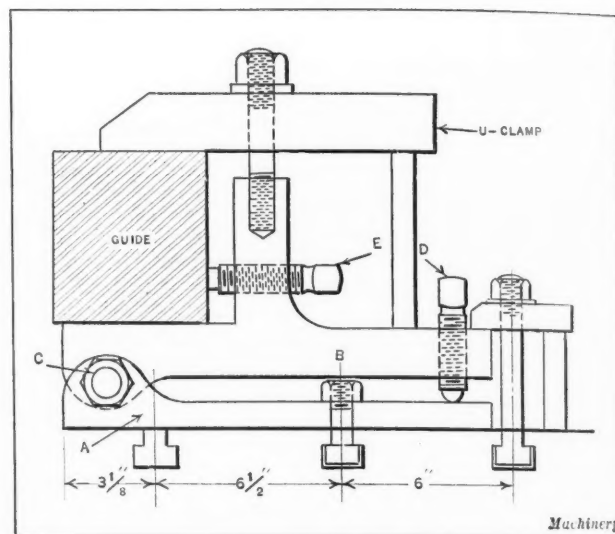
Side View of Guide Bar Clamp, Showing Means of Adjustment
